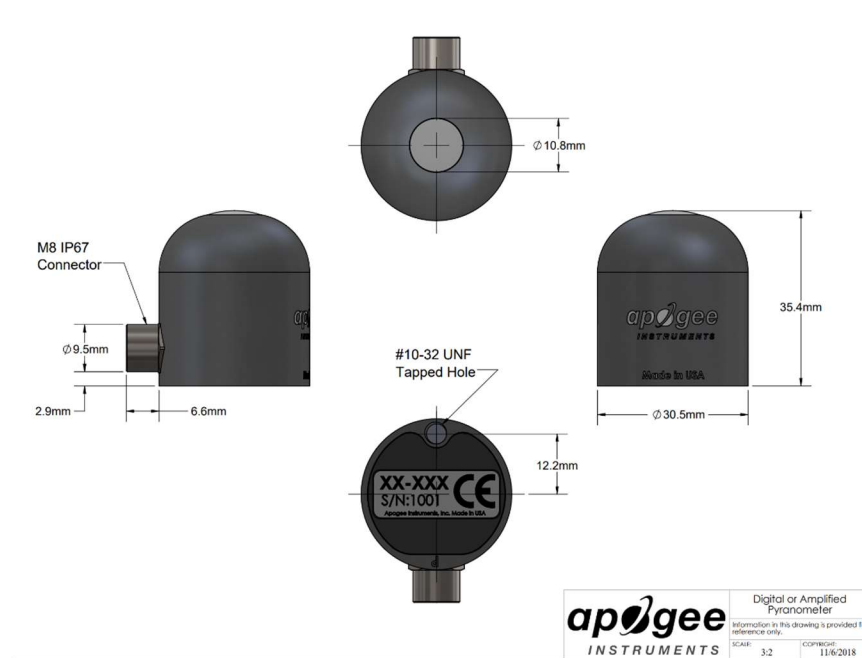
Manufacturing Drawing of part SS#2-P#4- Pyranometer
